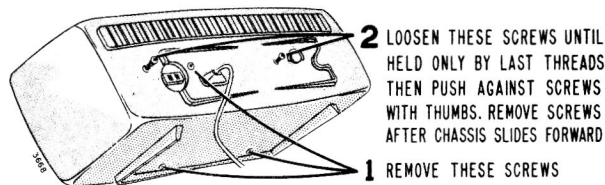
Rear View of Cabinet Showing Chassis Mounting Screws.
